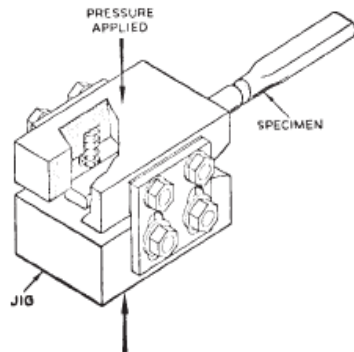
Squeezing Jig for Flattening Ends of Full-Size Tension Test Specimens
